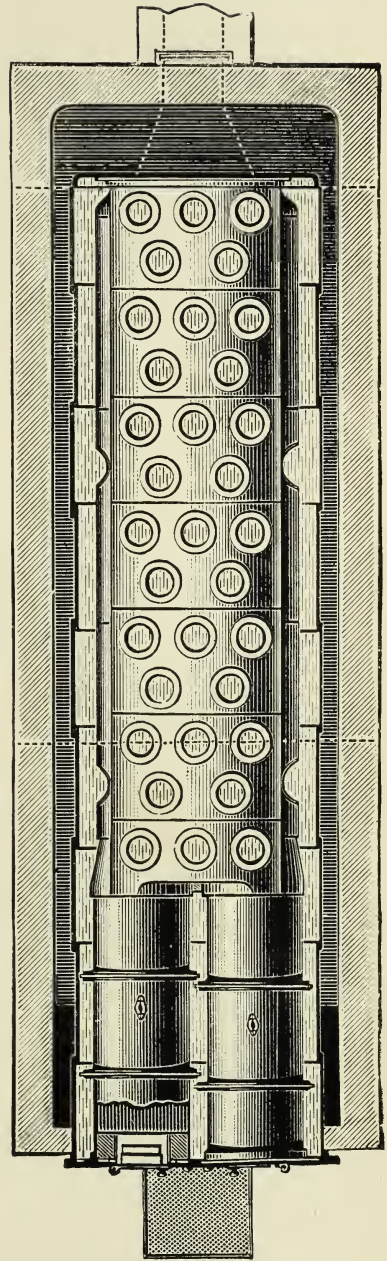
THE GALLOWAY BOILER. Plan showing Disposition of Tubes and Brickwork Bed.
